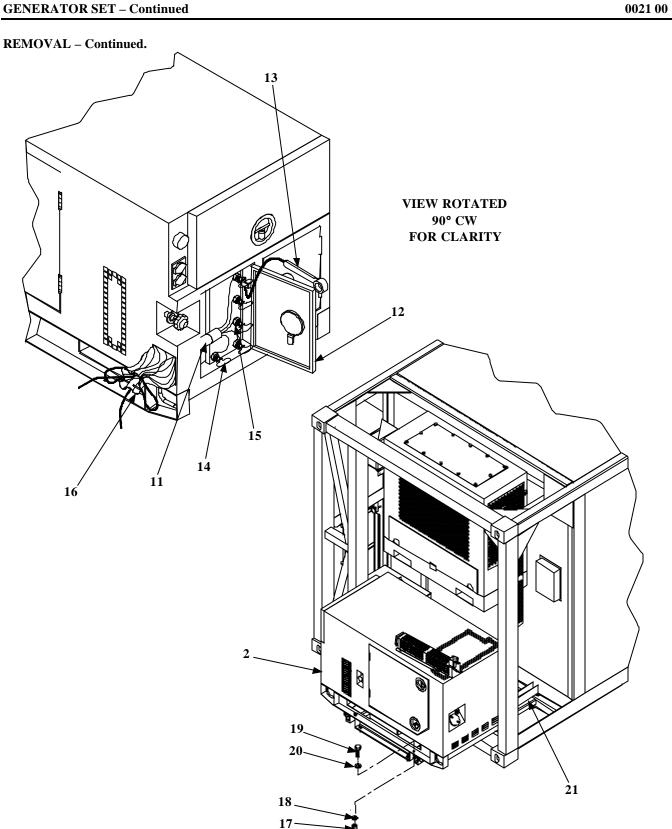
Generator Set Removal / Installation (Sheet 2 of 2)
